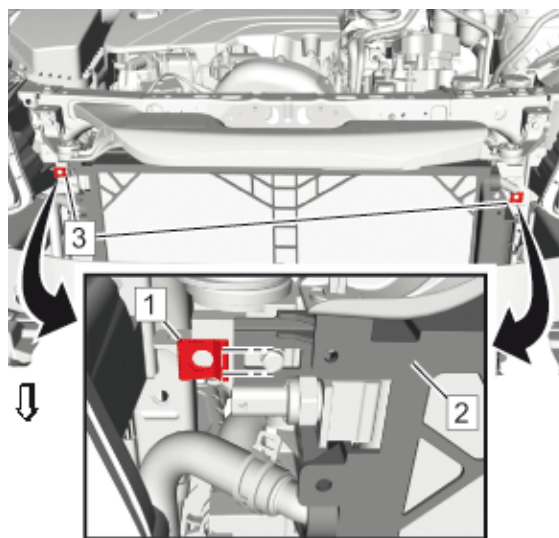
Air Conditioning Condenser Bracket Spring And Radiator Assembly
